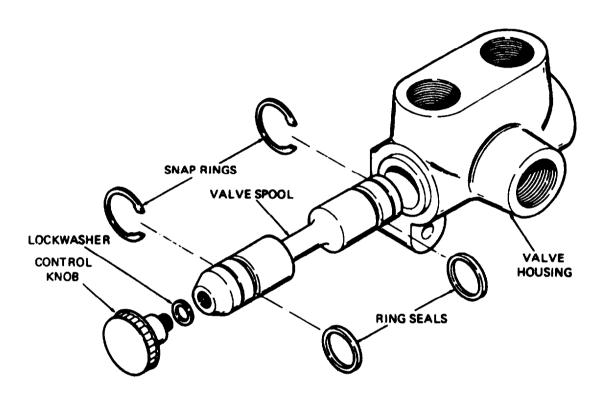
G-1. Swing Brake Lock Valve (36Z361)
